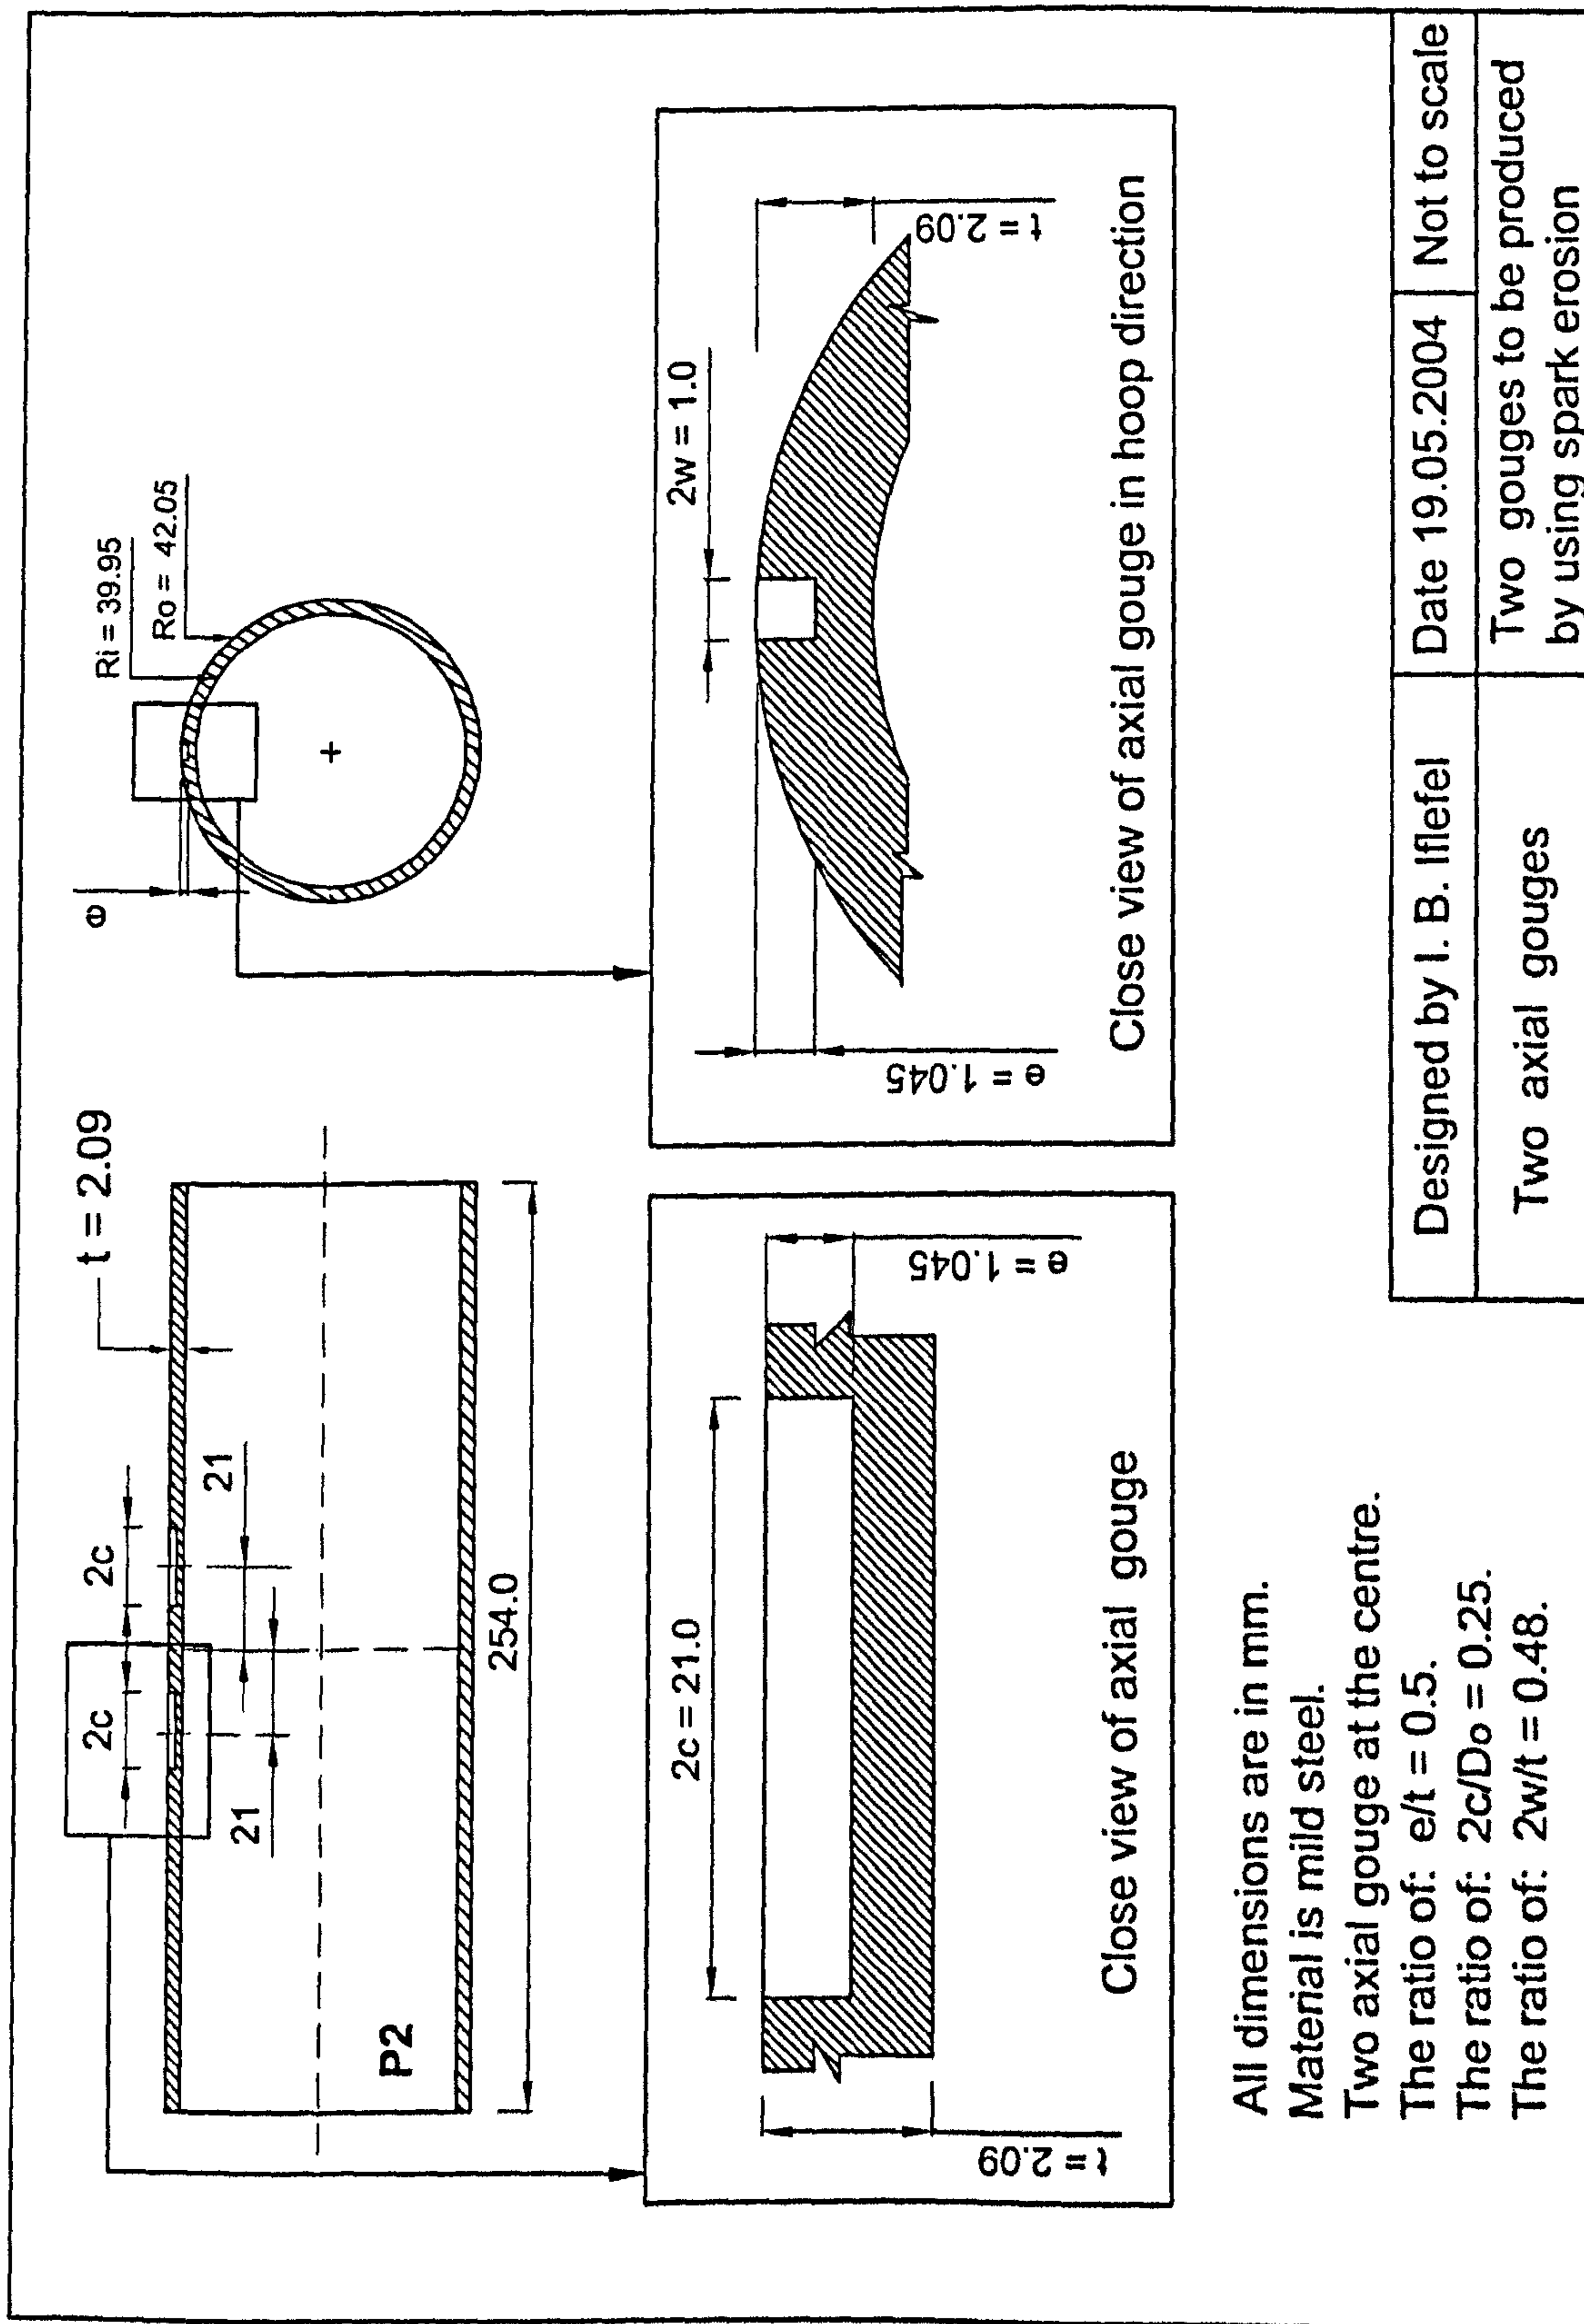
Sketch of the machined two axial gouges at off-centre created by using electrical discharge machine (in part P2 of model SP5).
